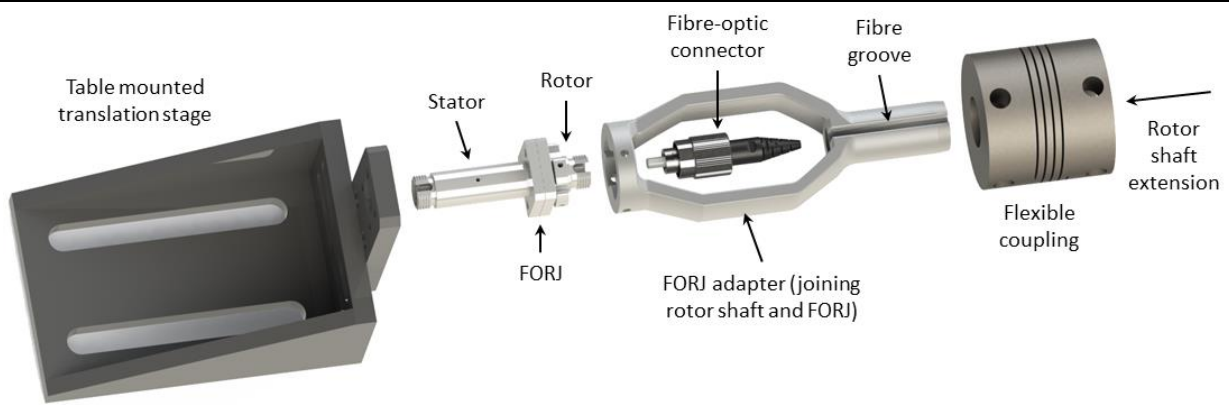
Fibre-optic rotary joint (FORJ) used to couple the sensor signal out of the rotor shaft
